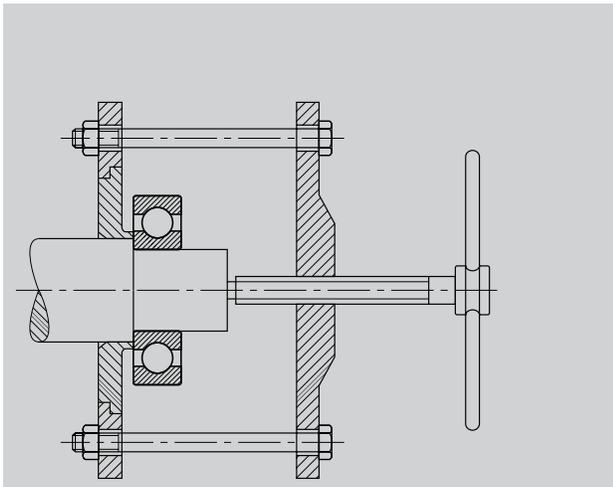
Dismounting of Ball Bearing by using a Extraction Tool
